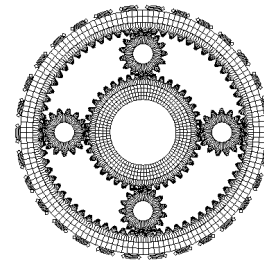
A model for increasing the ring gear rim thickness and decreasing the pinion gear inner diameter
